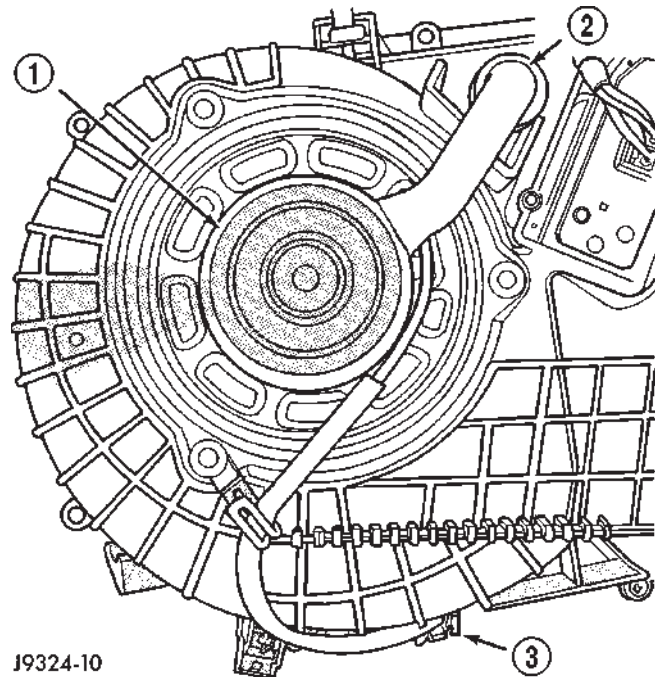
BLOWER MOTOR REMOVE/INSTALL
